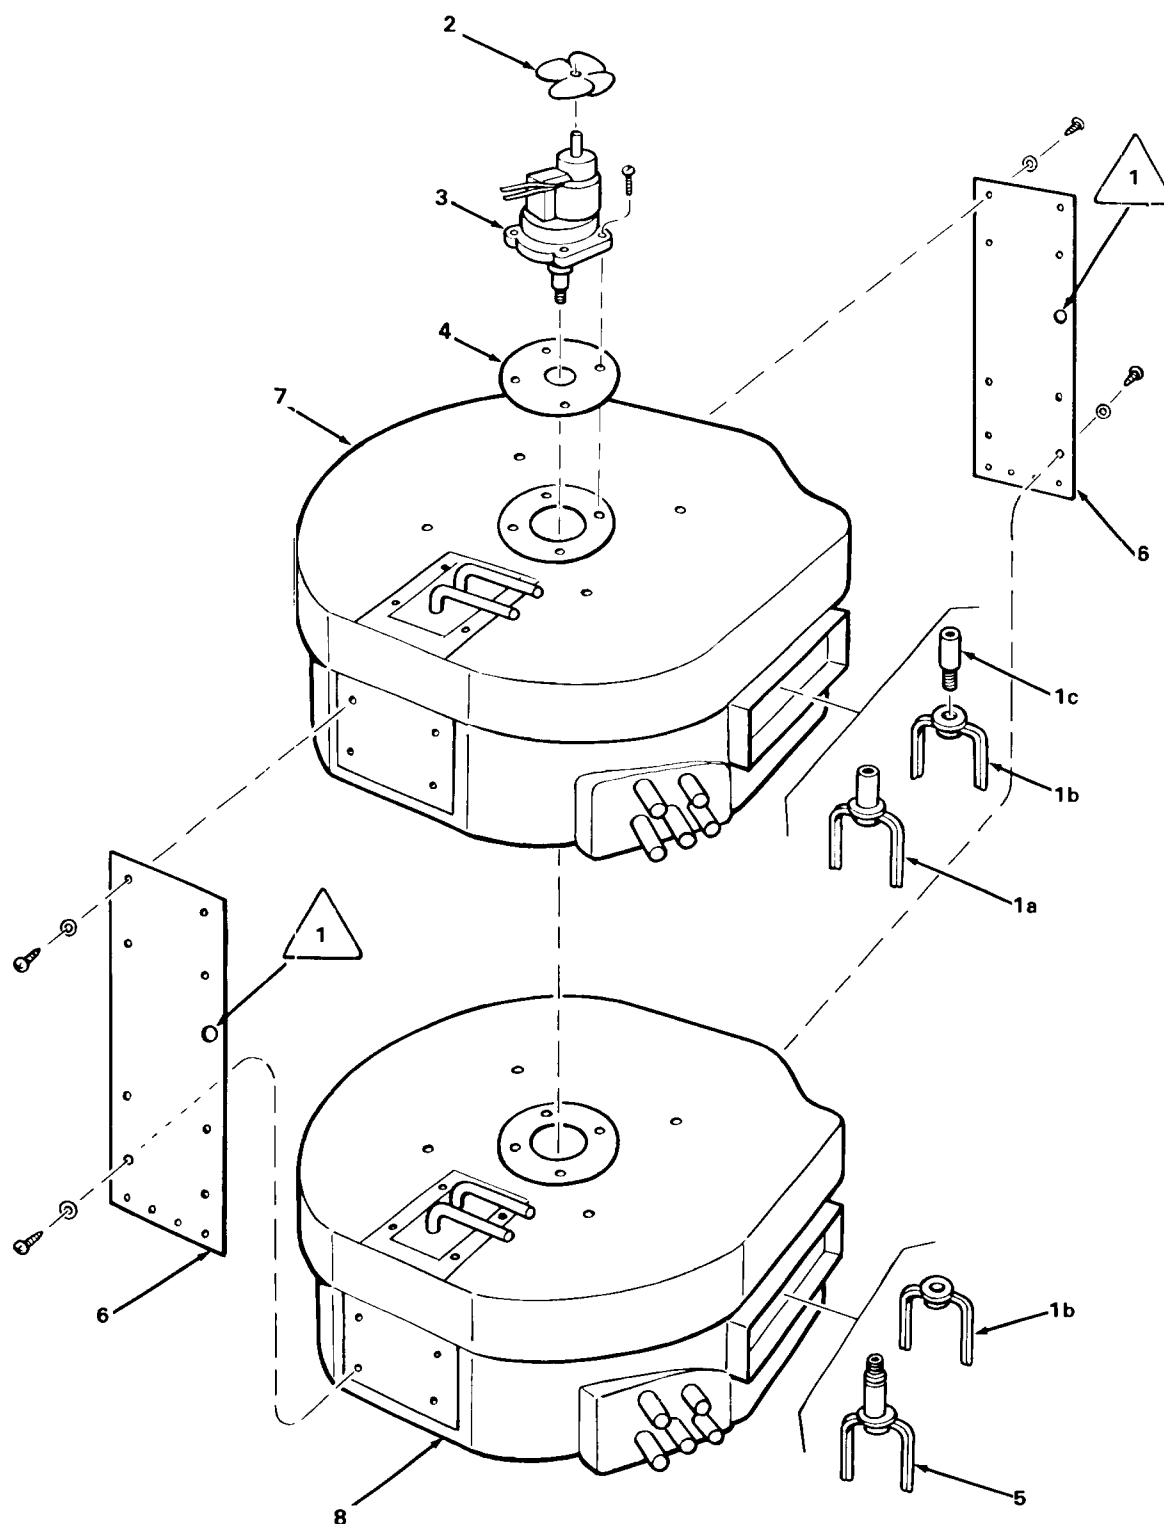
Fan Motor & Air-Cooled Condenser Assembly.
